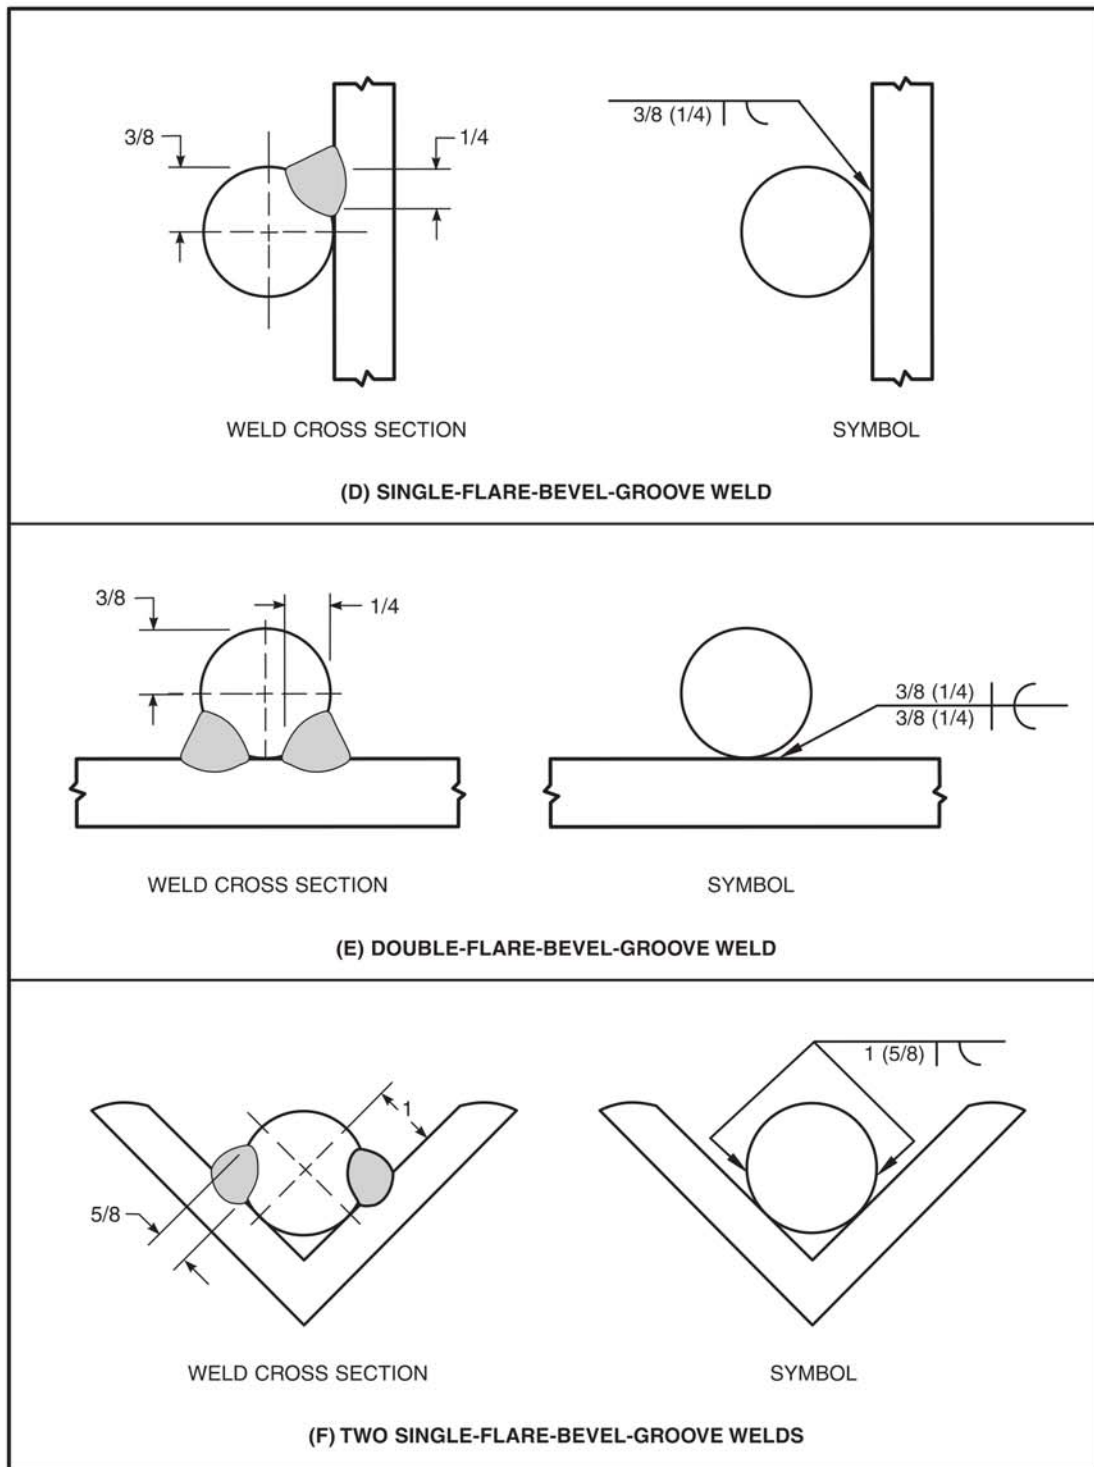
(Continued)—Application of Flare-Bevel and Flare-V-Groove Weld Symbols
